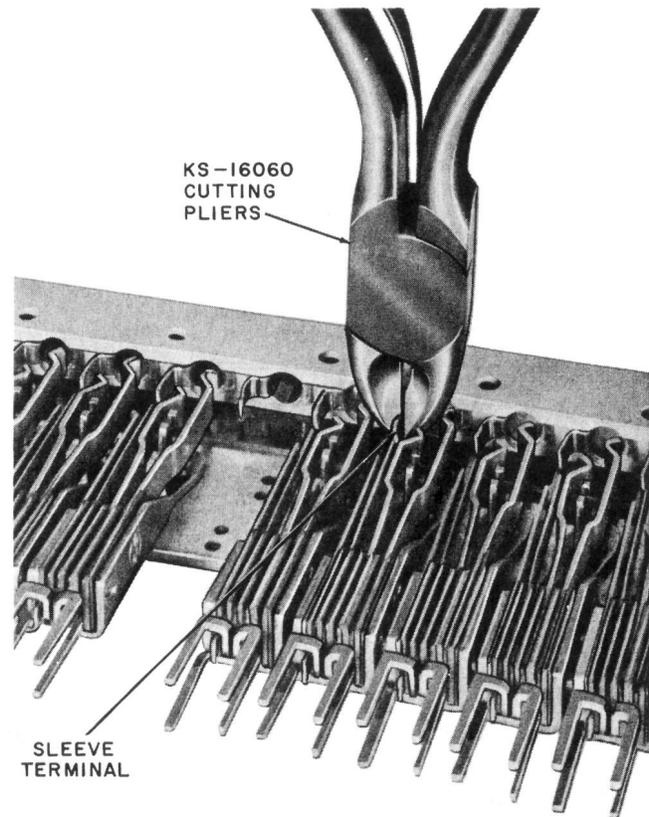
Method of Cutting Welded Sleeve Terminals on 510-, 511-, and 512-Type Jacks
